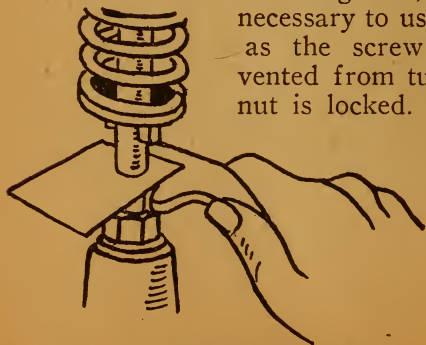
Illustrating how to use card as a feeler in adjusting push rods.
